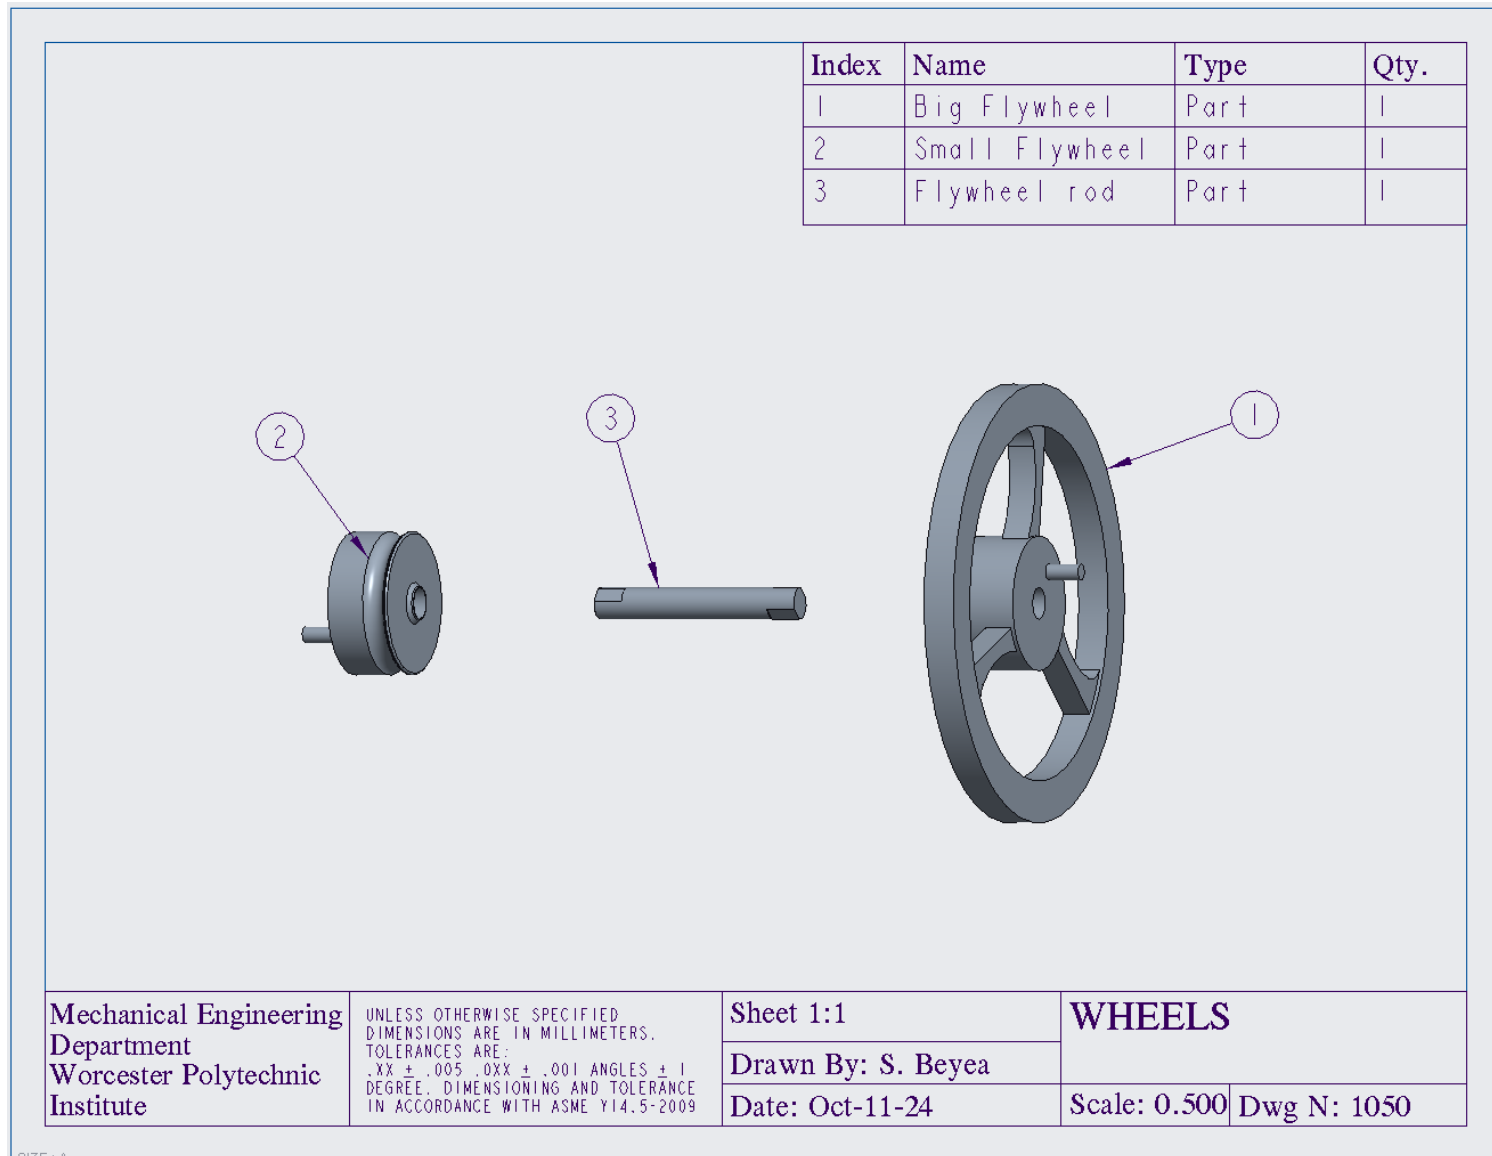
exploded view of the flywheel assembly (with balloons and BOM).
